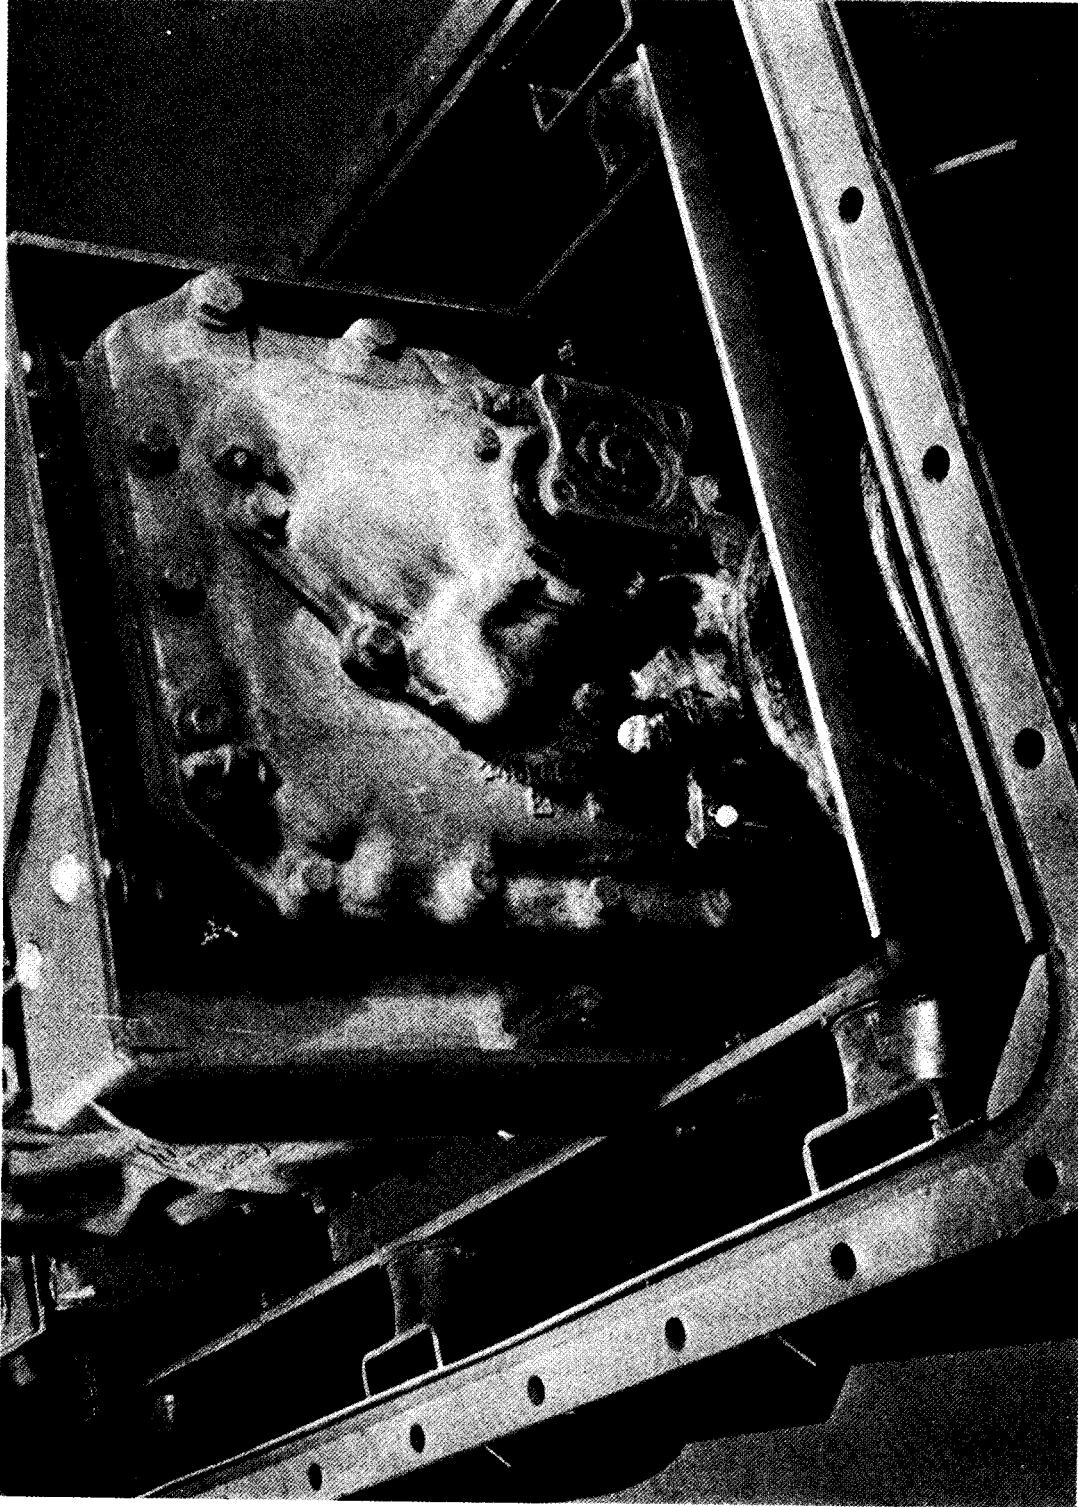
Shock Mitigation Using Rubber Shear Mounts
